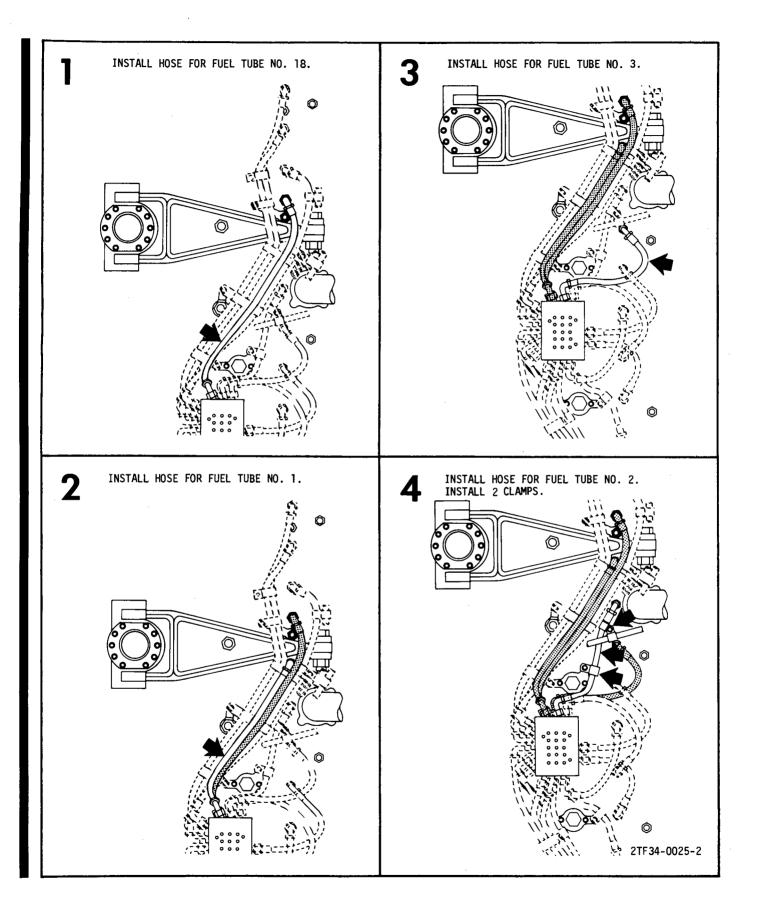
Fuel Manifold Installation (Sheet 2 of 6)
